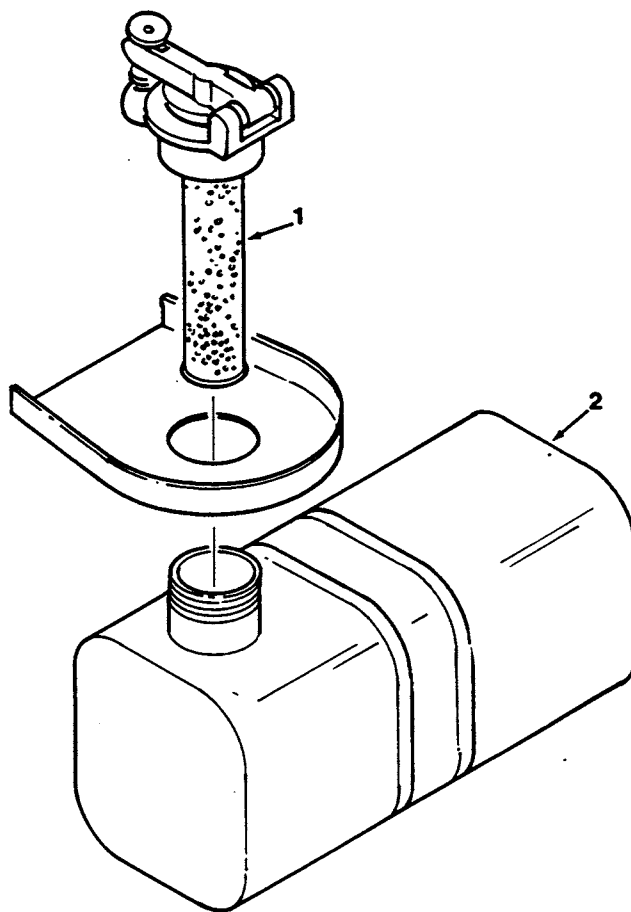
PROTECTOSEAL FUEL TANK CAP KIT
